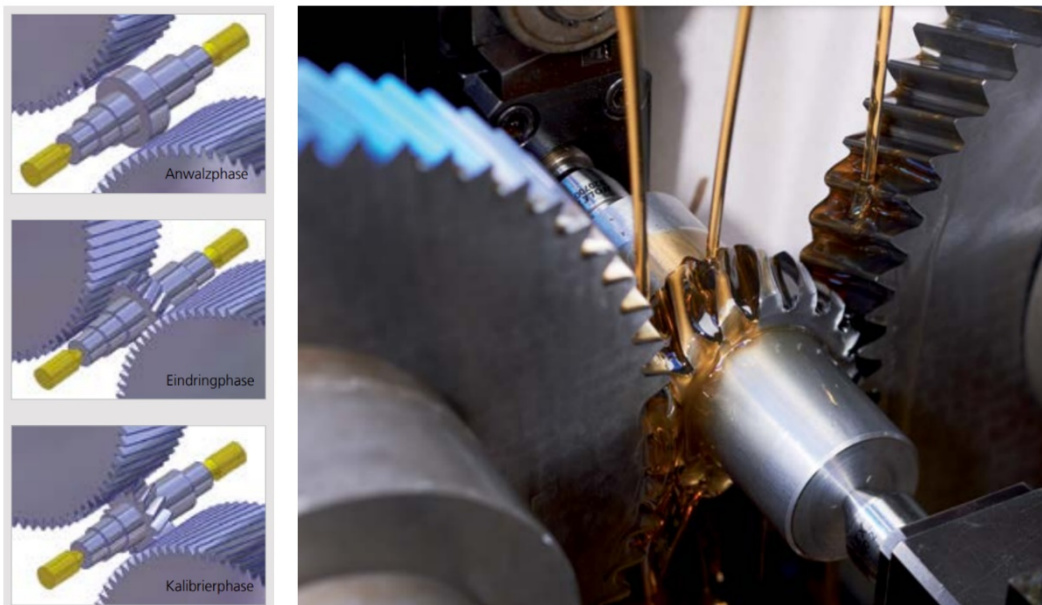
Model (left) and real appearance (right) of the helical gearing rolling [7].
